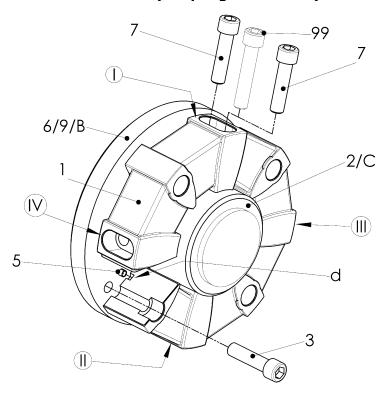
Mounting the rubber element (Type 008A-00250-.N..)
